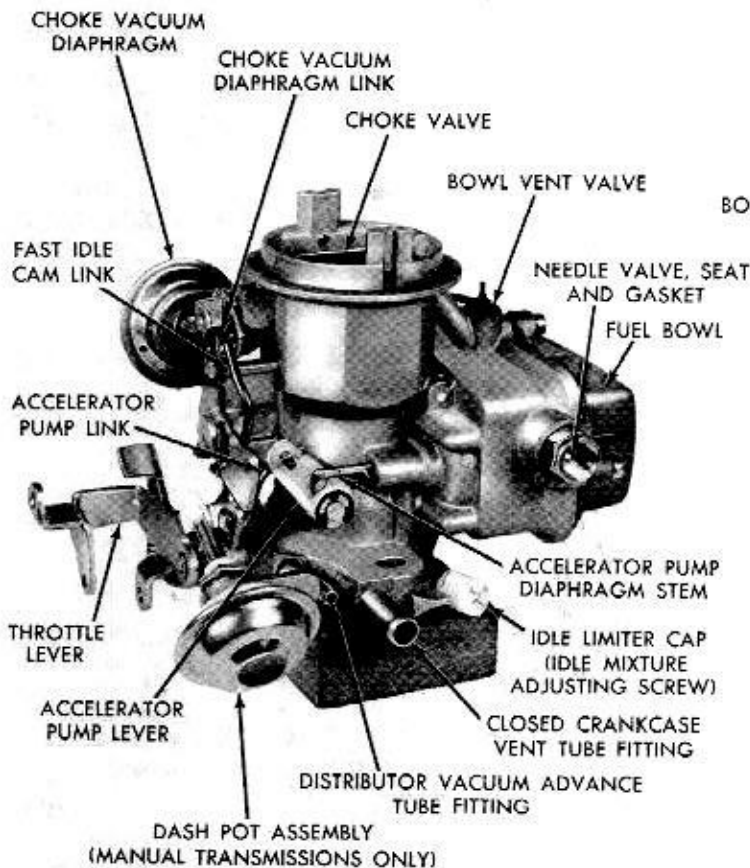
Carburetor Assembly (Holley 1920 Series) C.A.S.
